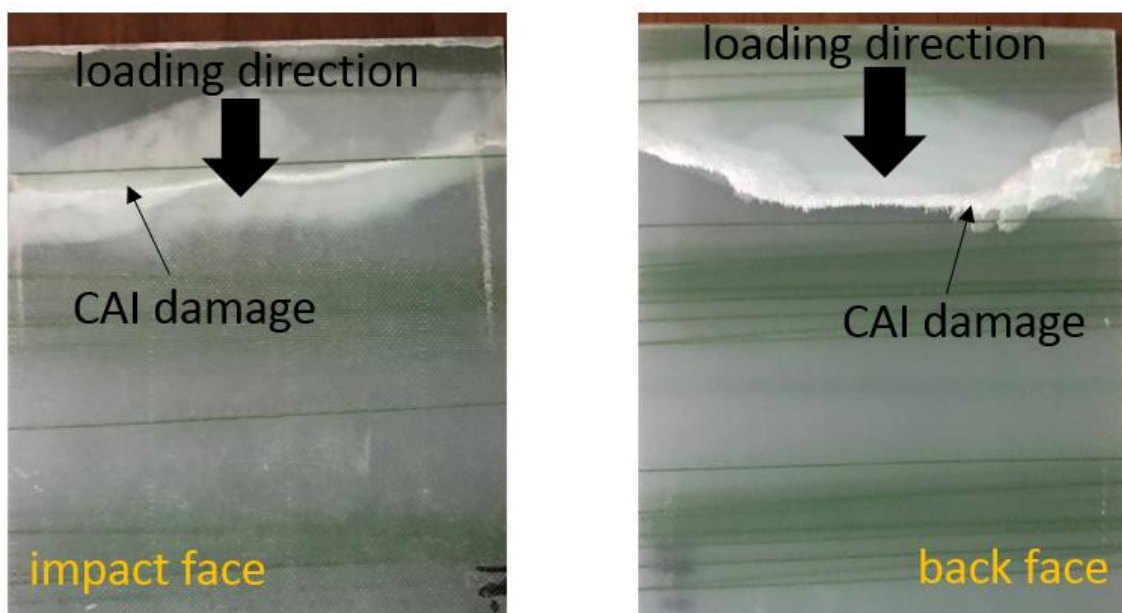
CAI damage of S2 glass / epoxy specimen for 18-0J (unimpacted)
